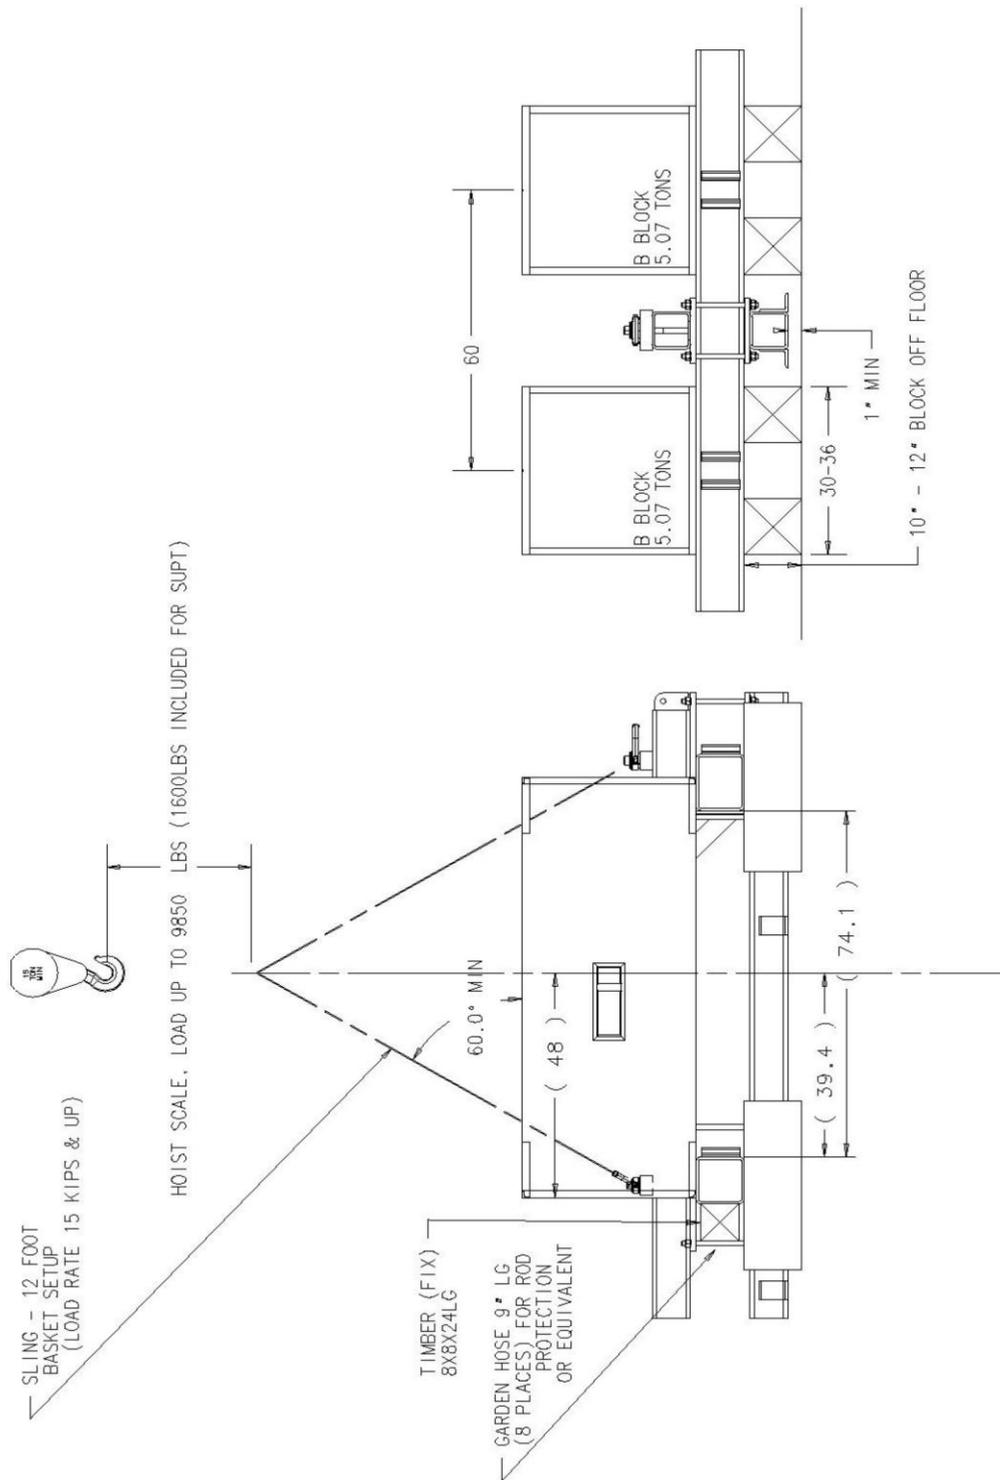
The horizontal setup of the load test for the coil turning lifting fixture.
